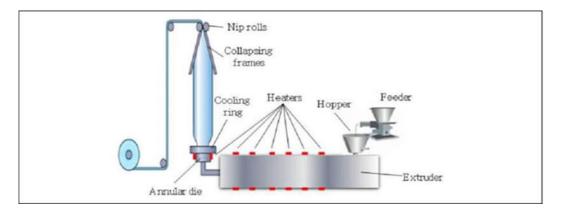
Blow Film Extrusion Machine. (http17)
